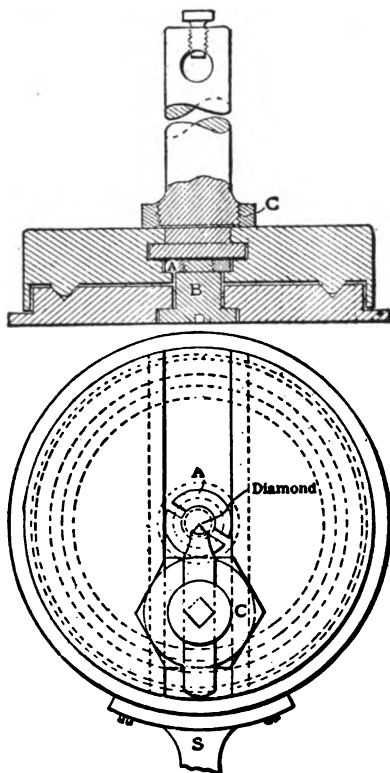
Rig for Grinding and Rounding Emery Wheels.
